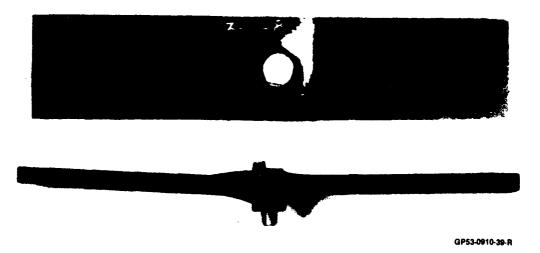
Failed Unloaded Hole Fatigue Test Specimen
